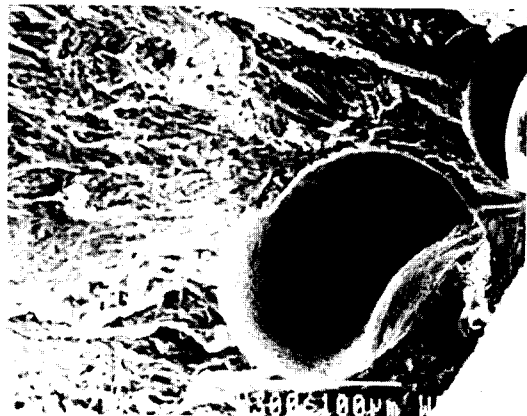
Fatigue fracture surface (GMAW) - fatigue initiation area
